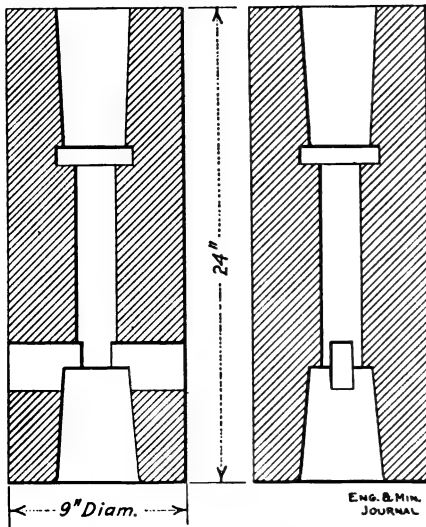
STAMP HEADS WITH BORED CENTER.
